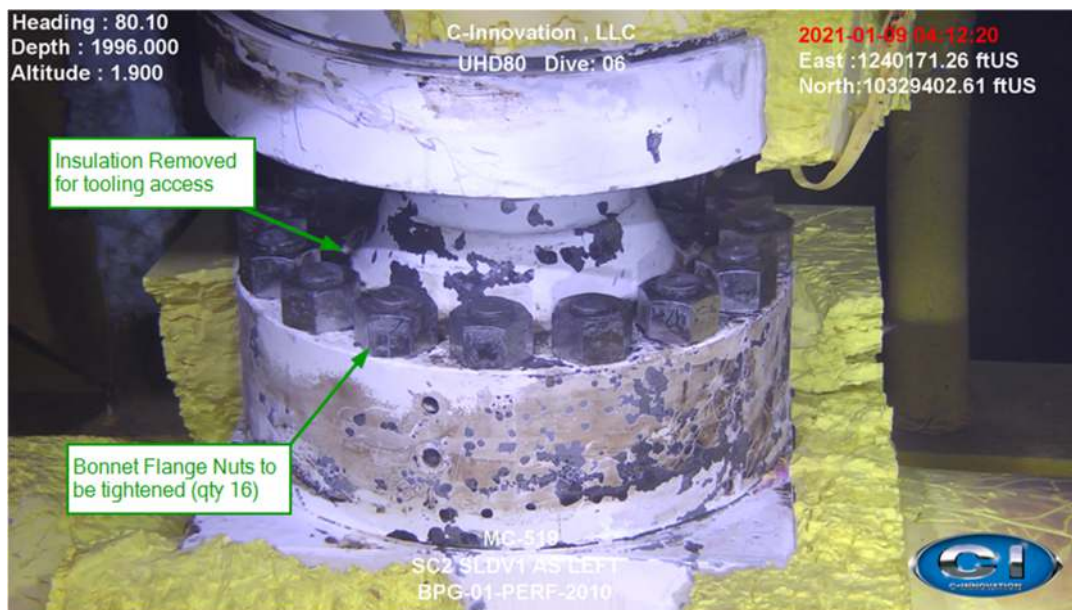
Completed Insulation Removal for Bonnet Bolt Access
